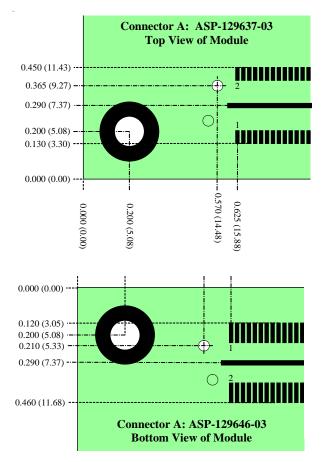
Top Side and Bottom Side Views of Connector Placements Dimensions are in inches / [millimeters]
